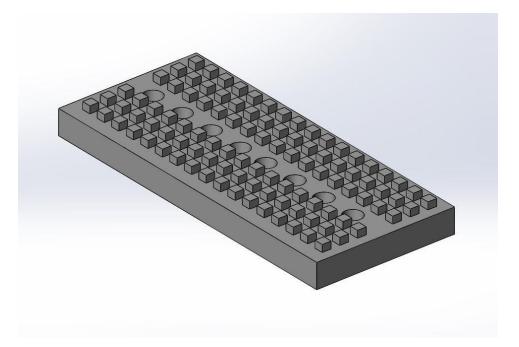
Hand Gripper for Conveyor Belt Slicer Version 1
